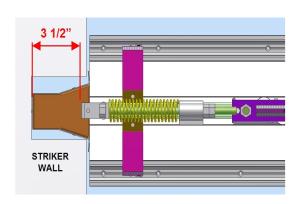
c. Single-Slide Closed Limit (Bottom View)
